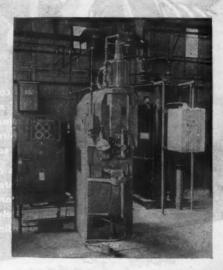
Individual power transformer (2300/460V) supplies welder. Note high-voltage cutouts, low-voltage air circuit breaker, and control panel.
